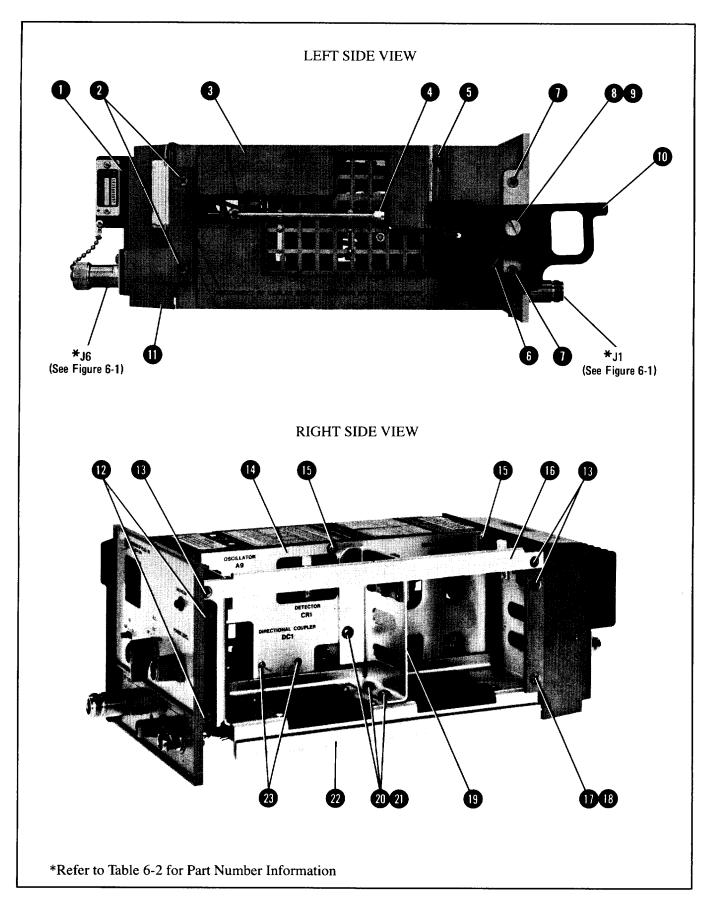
Overall Instrument Parts Identification (3 of 4)
